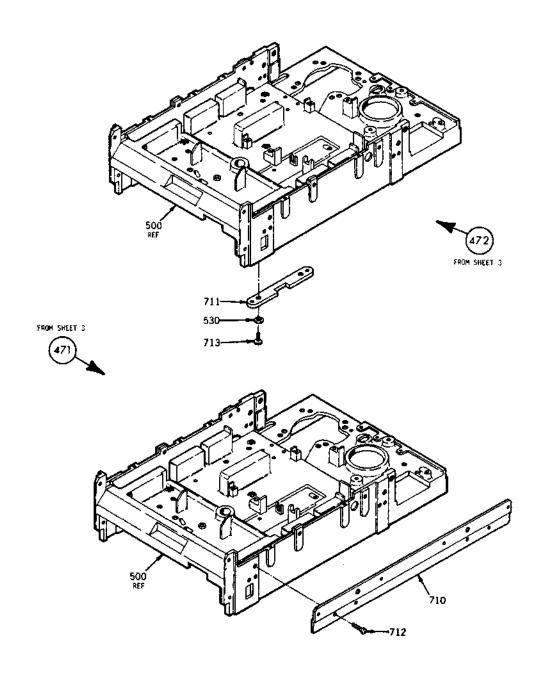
STEPPER BRAKE AND CARRIAGE ASSEMBLIES
